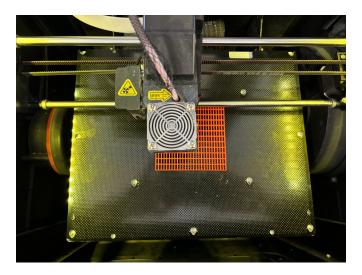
The process of printing thermoplastic "honeycomb" structures using the UP BOX+ 3D printer.
